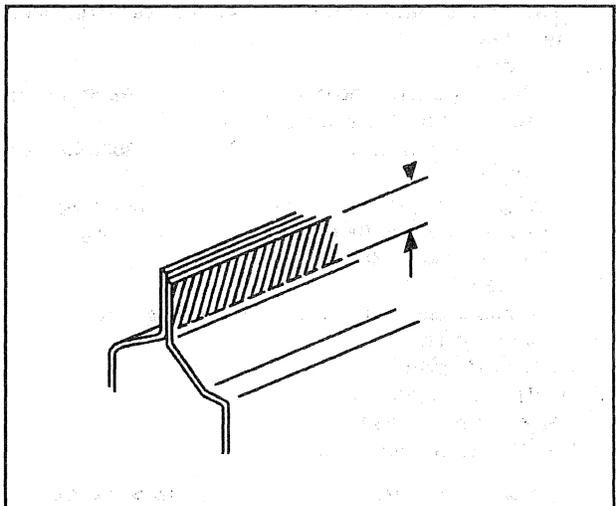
Window Frame Pinchweld for Body Primer
